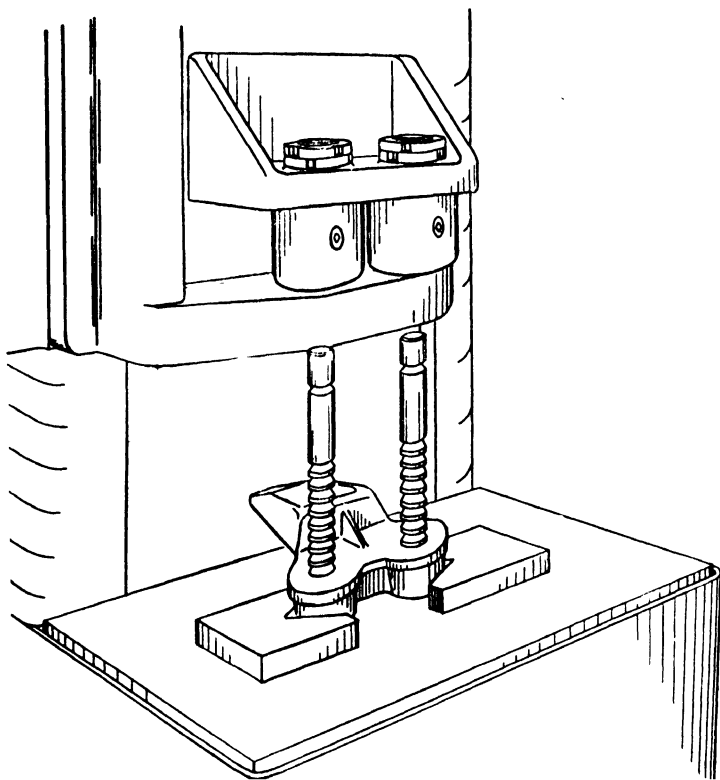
Indicated setup for holding and accurately broaching the two holes in a crawler-type tank-chain link. (Courtesy of Colonial Broach Co.)
